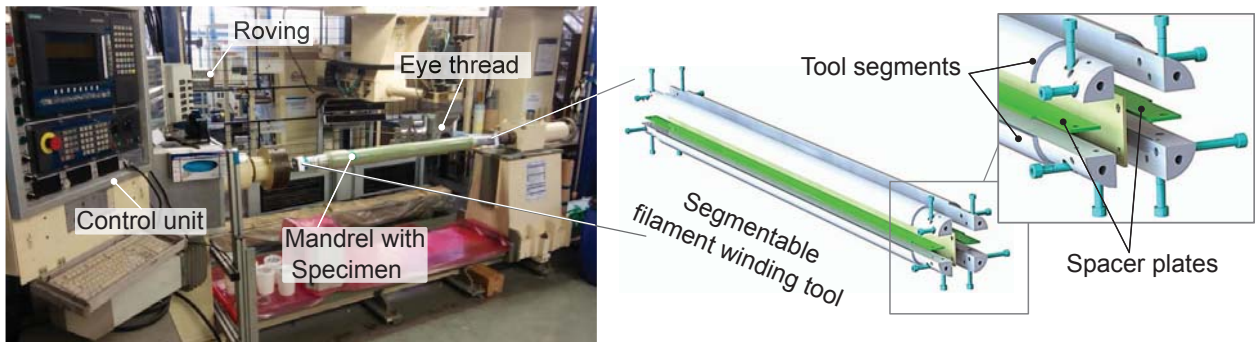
Manufacturing of the generic tubular composite structure using a filament winding machine and the tool segments.
